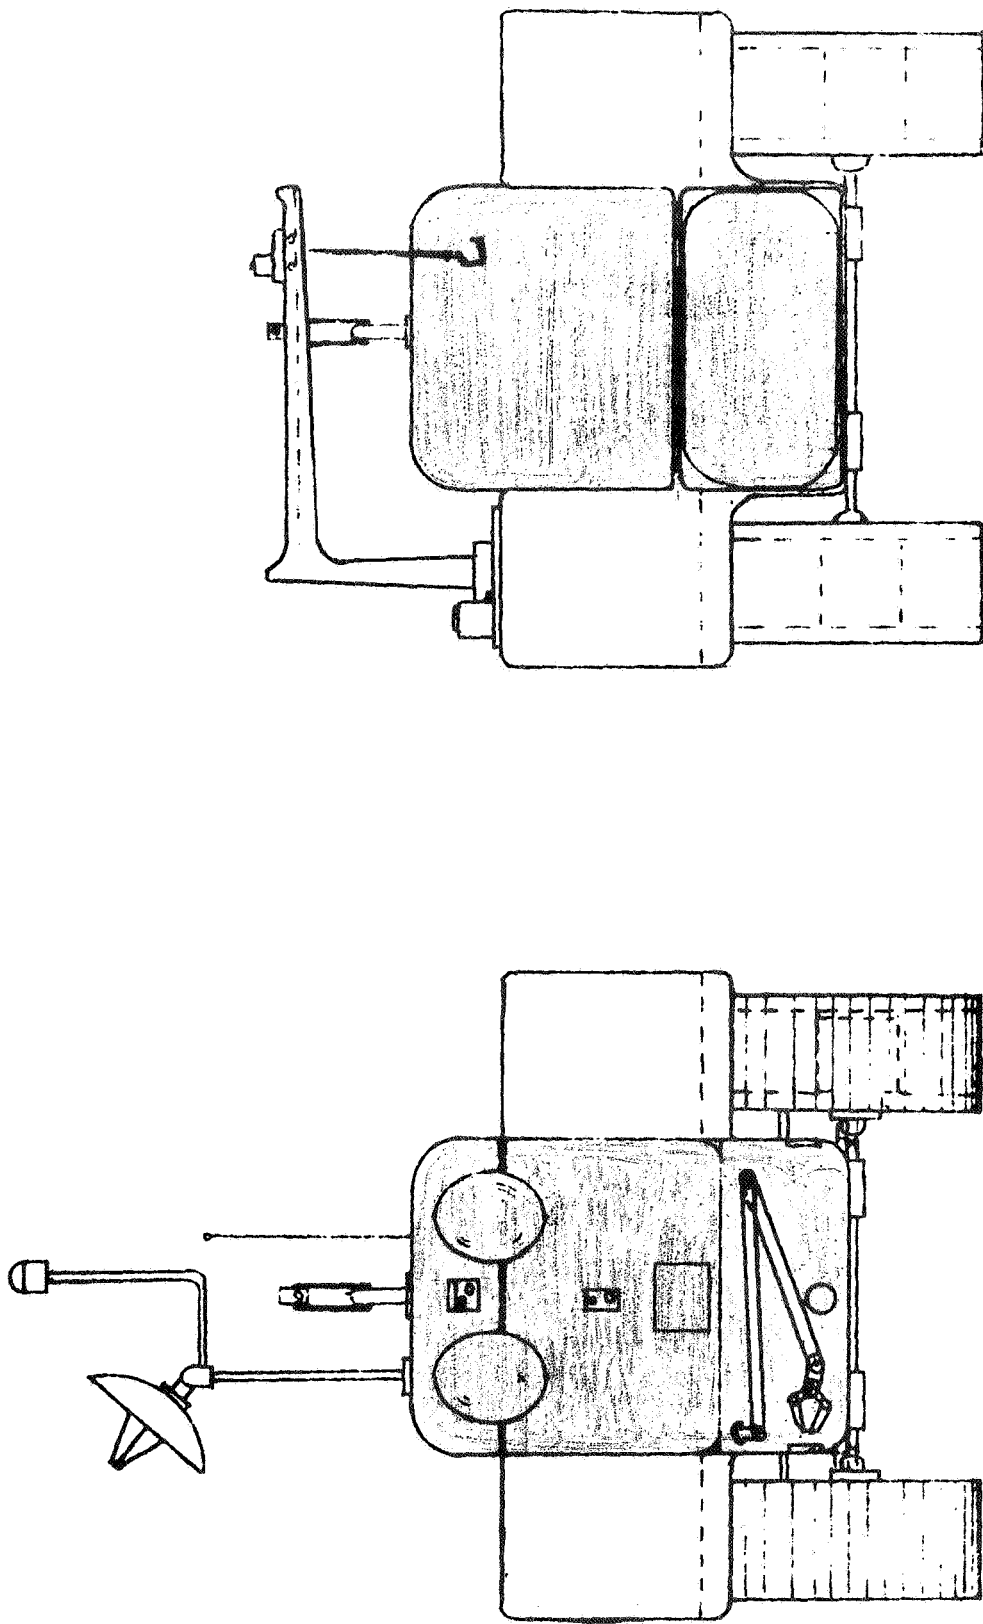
CABIN SUBSYSTEM - FRONT AND REAR VIEW
